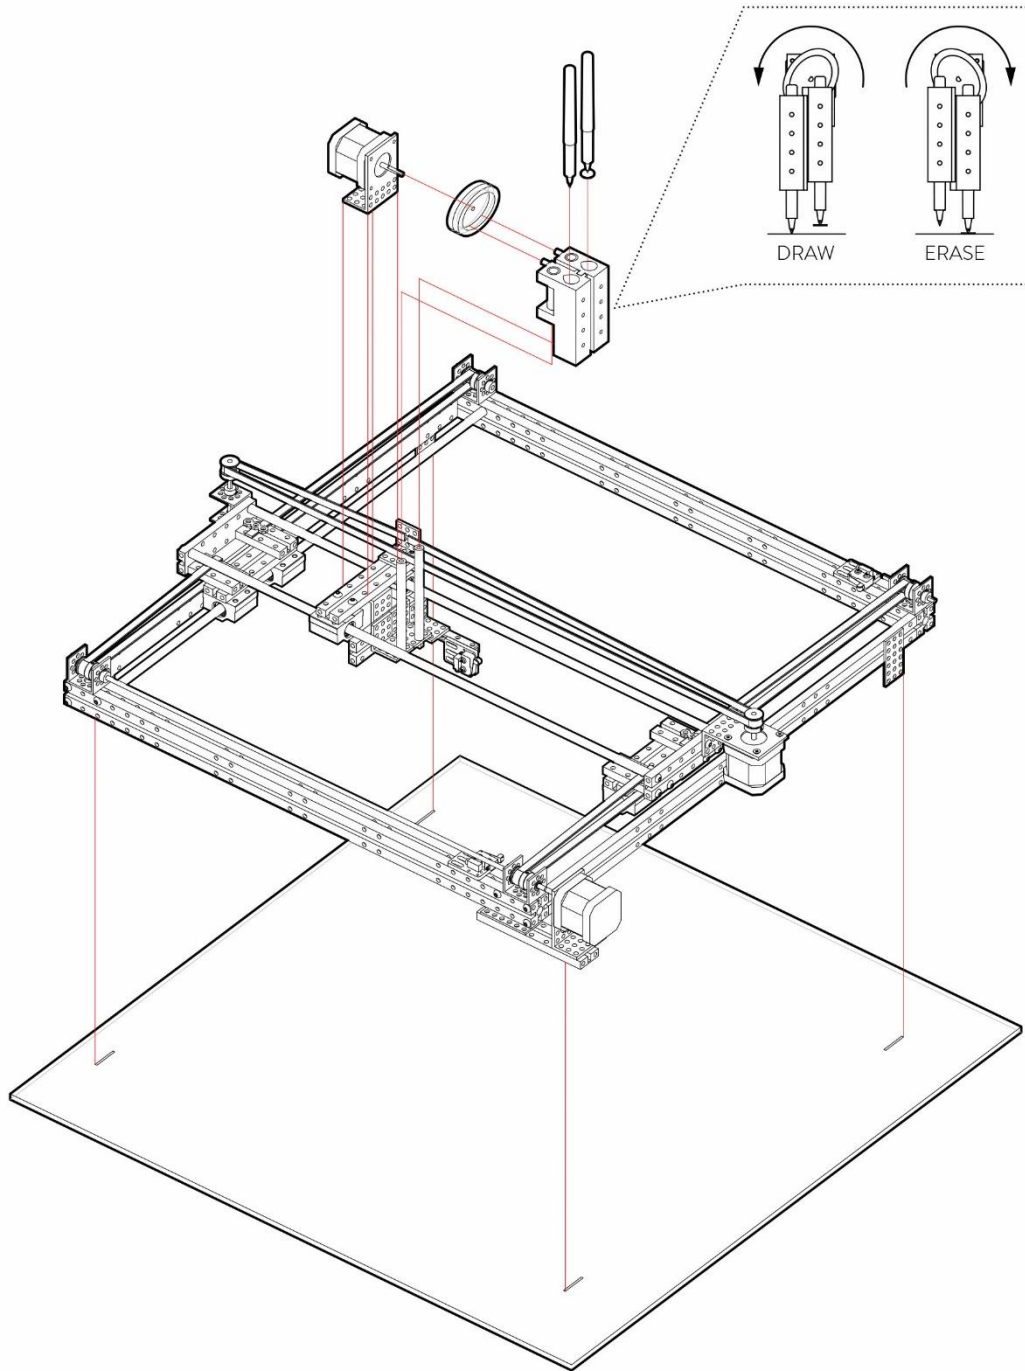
Exploded axonometric of drawing machine. The diagram in the upper-right corner shows how the motion of the elliptical rotor on the Z-axis allows the machine to both draw and erase.
